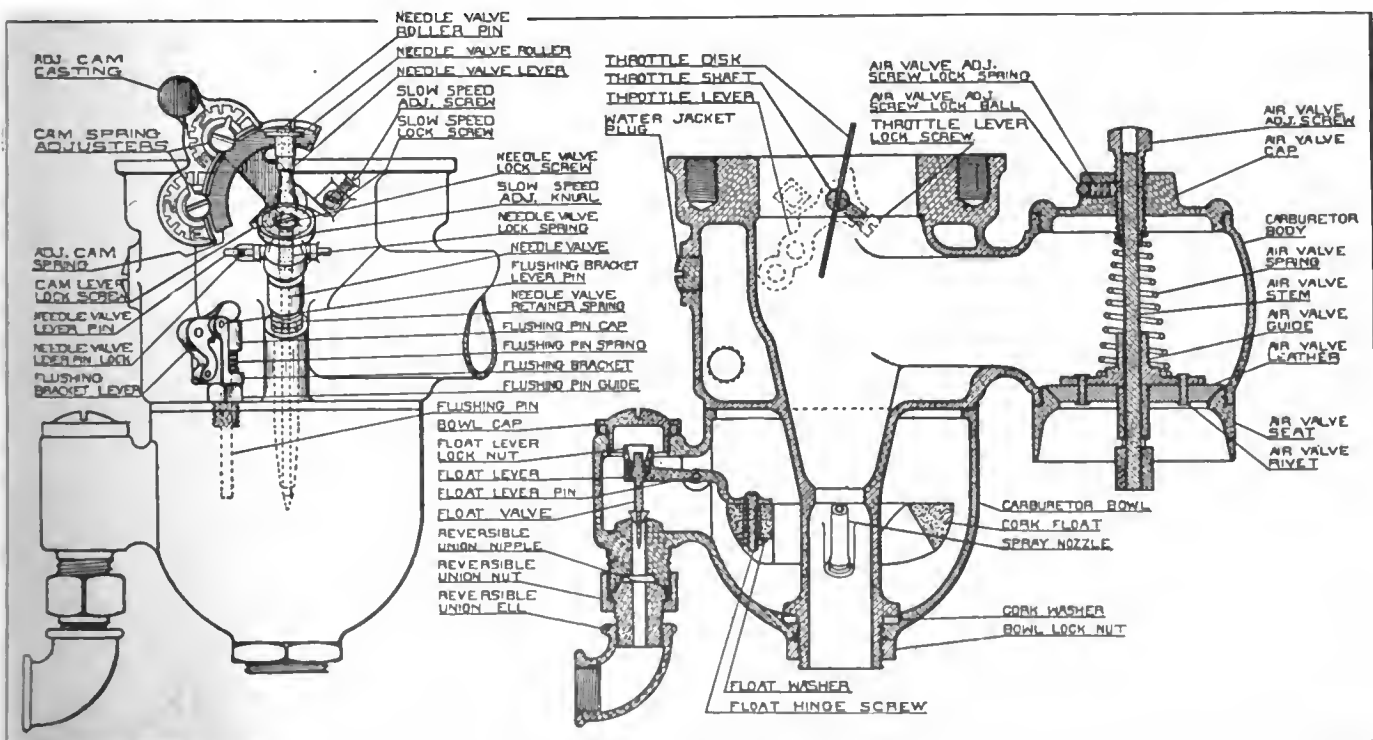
Section of the present model of Schebler carbureter, showing strangle type, auxiliary air valve, and adjustments
